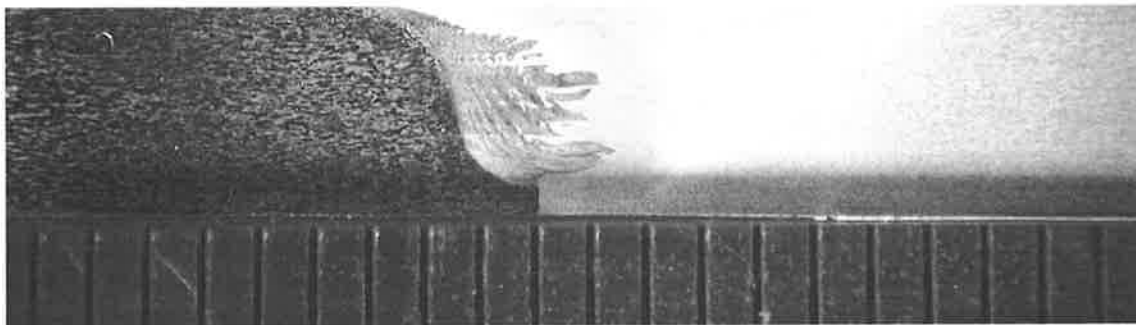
Dissimilar alloy friction stir weld where the 6056-T4 (dark alloy) has been placed on the retreating side and the 7075-T651 (light alloy) on the advancing side [128]
